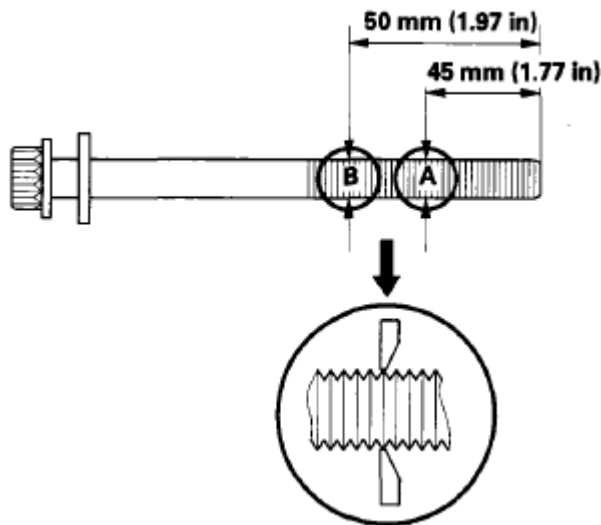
Measuring Diameter Of Each Cylinder Head Bolt
